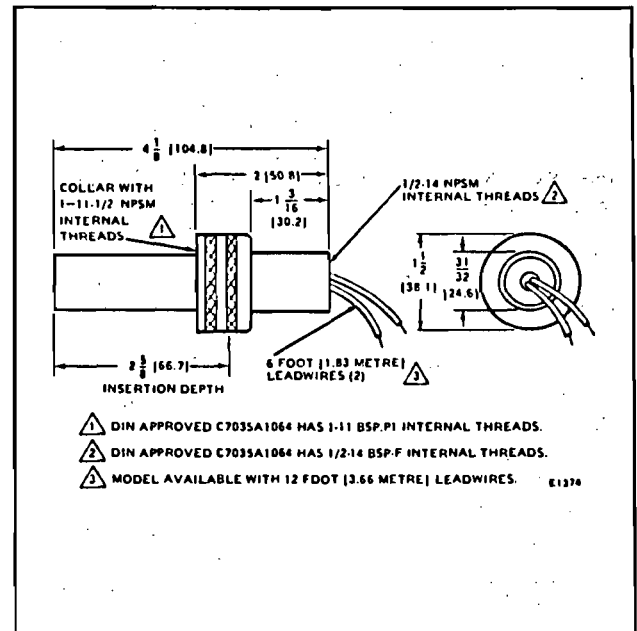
INSTALLATION DIMENSIONS OF THE C7035A, IN in. [mm IN BRACKETS].
